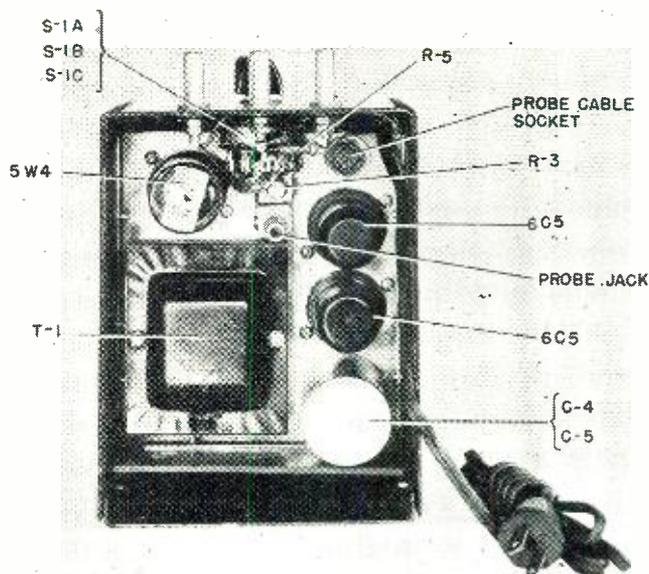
Internal construction and parts layout of the V.T.V.M.
